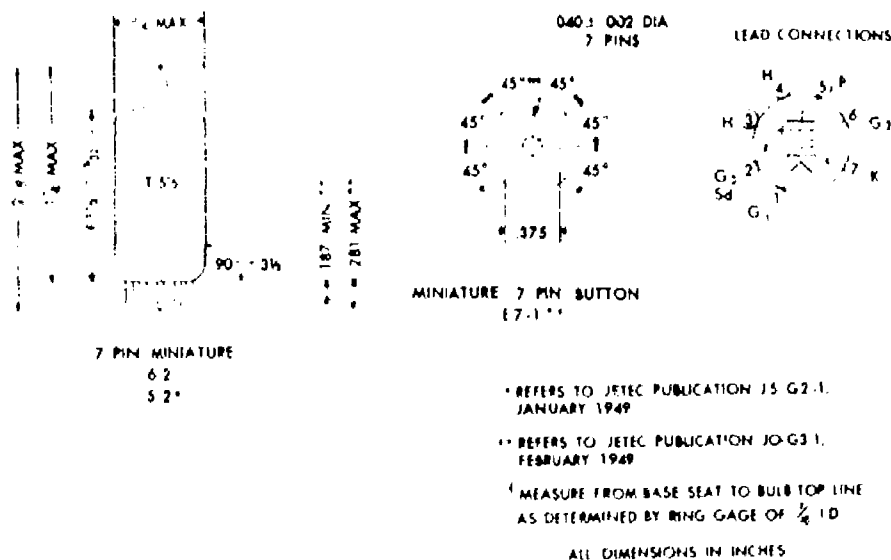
Outline Drawing and Base Diagram of Tube Type JAN-5749/6BA6W
